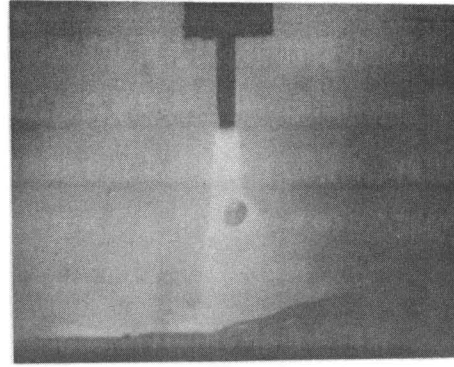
Detachment from wire tip and transfer in the arc column of metal droplets in MIG arc welding.
